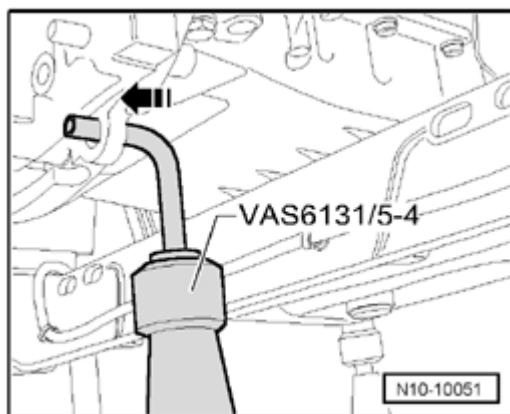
Angled Mounting Pin Of Support VAS 6131/5-4 Inserted Into Hole Of Oil Pan
